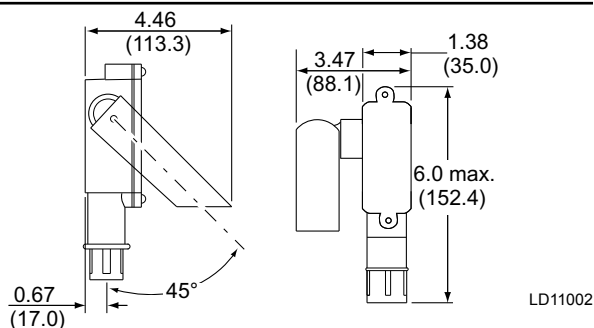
OUTDOOR AIR SENSOR - IN./(MM)
